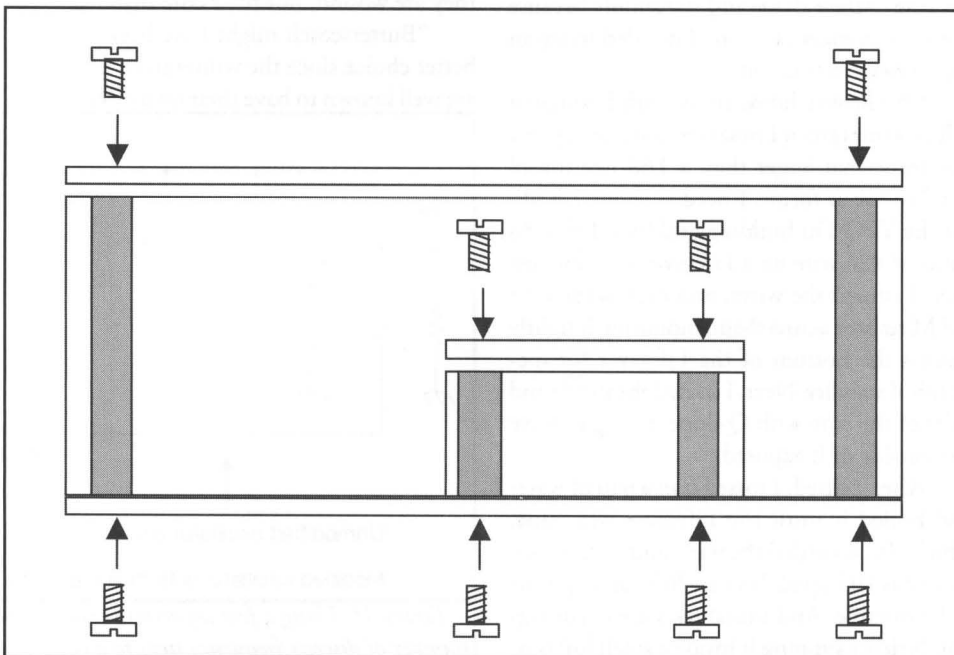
Using threaded spacers to hold covers on a box made of PCB material, instead of nuts soldered to the copper. This can also be used to hold the cover on an internal compartment as shown.
